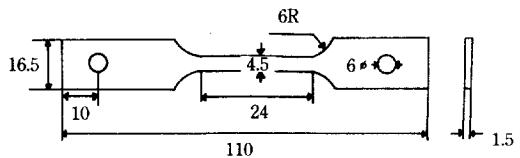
Shape and dimension of HSSCC and tensile test specimens
